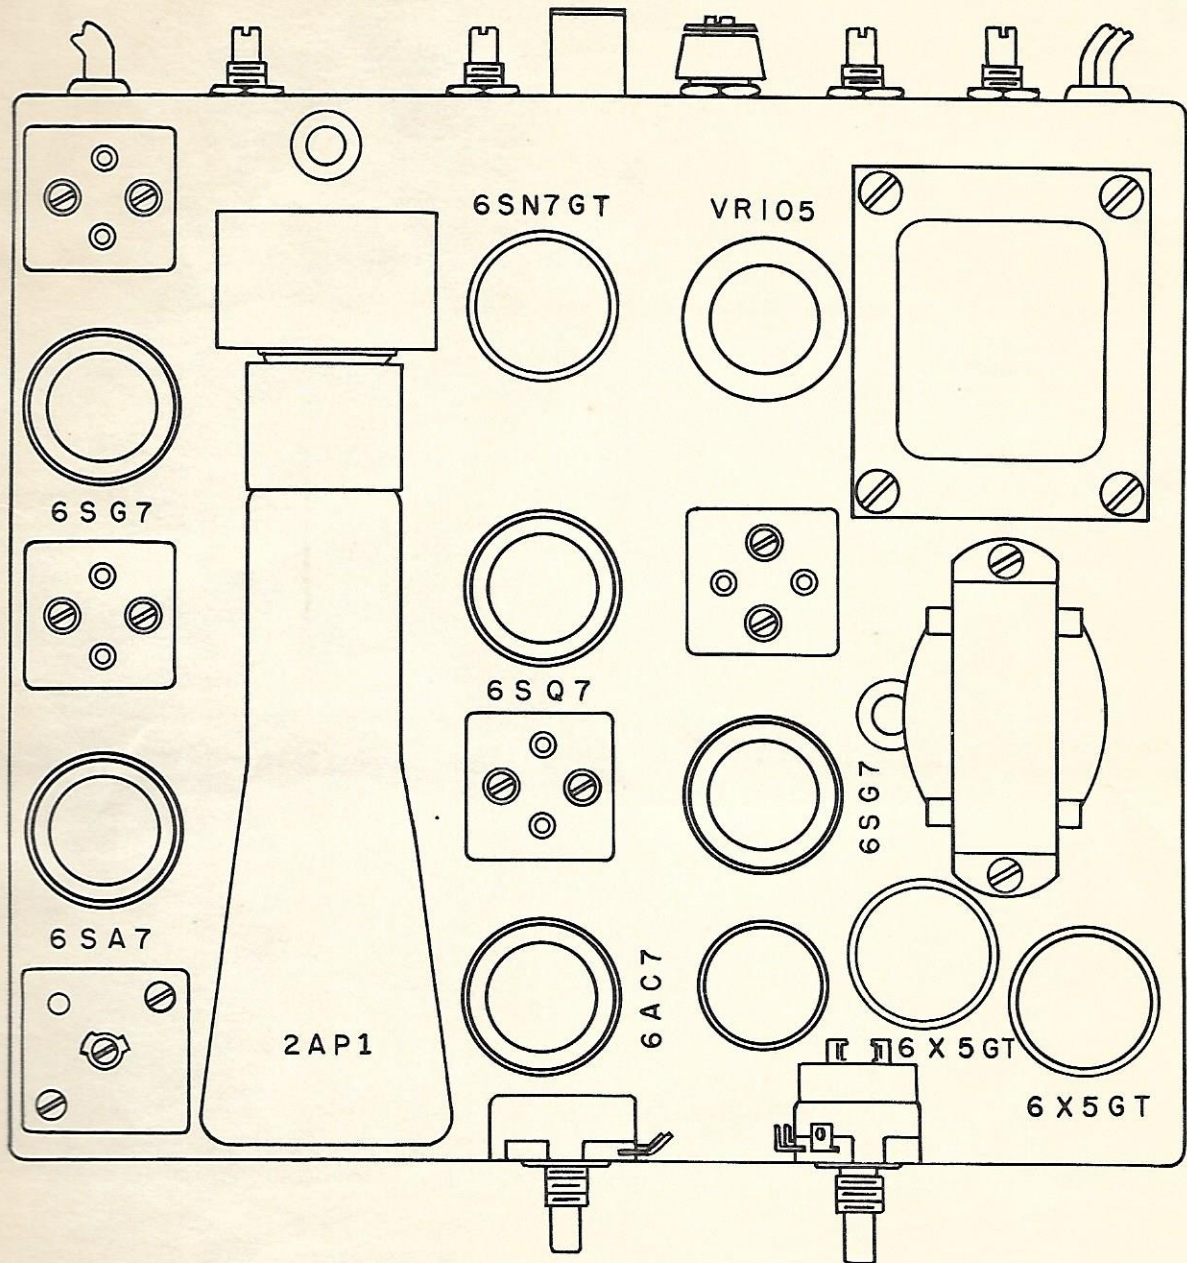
Sky rider Panoramic Model SP-44, top view showing tube locations.
